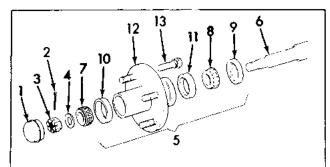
C-45. Front Wheel - 3 Wheel Car - Exploded View
